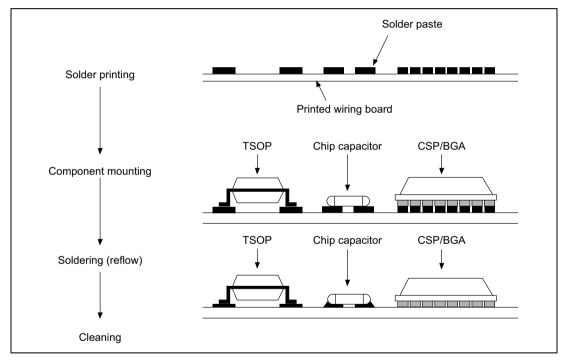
Single-Sided Surface Mounting Process Diagram
